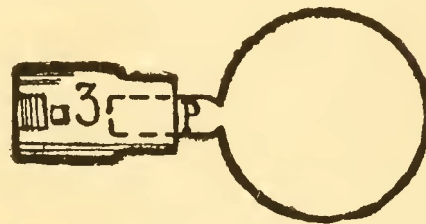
PLUG DRIVEN INTO MANDRIL SPINDLE.
